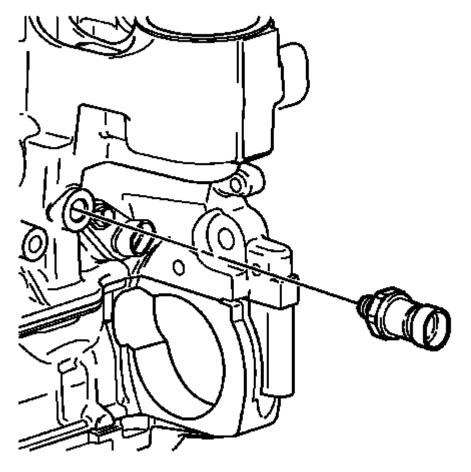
View Of Knock Sensor & Bolt Courtesy of GENERAL MOTORS CORP.
